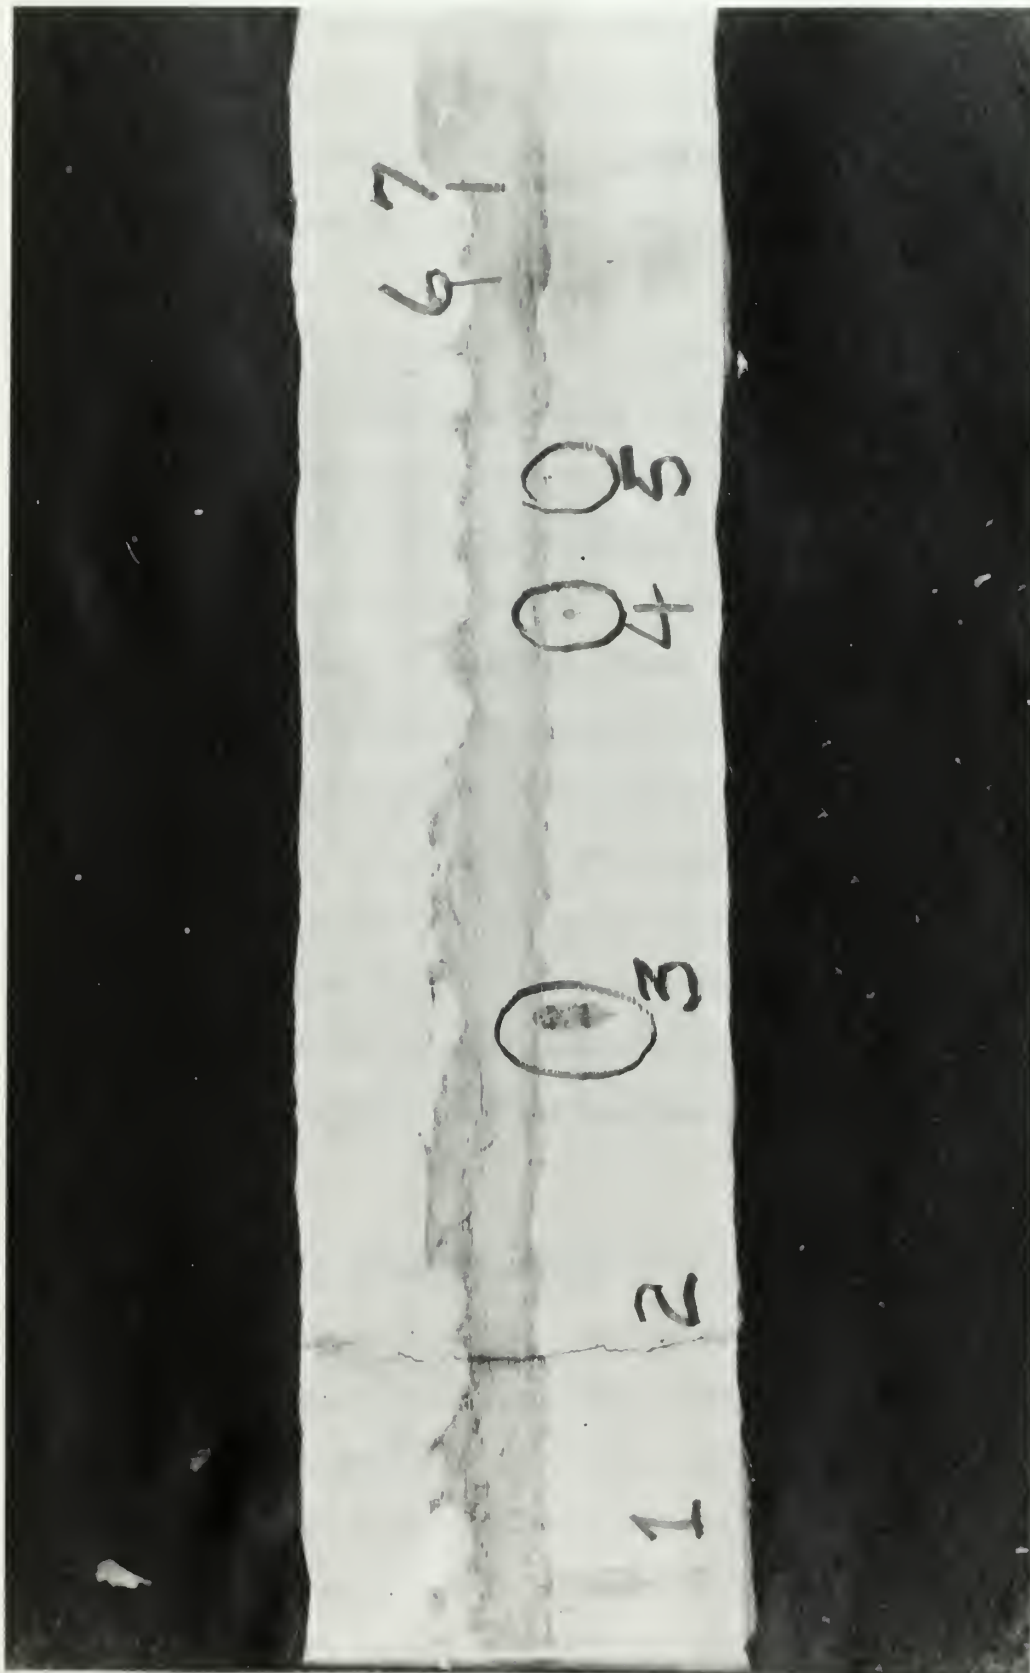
Spontaneous cracking in a welded joint of modified HY-80 steel, type 11018 electrode. Plate was unrestrained, welded without preheating.
